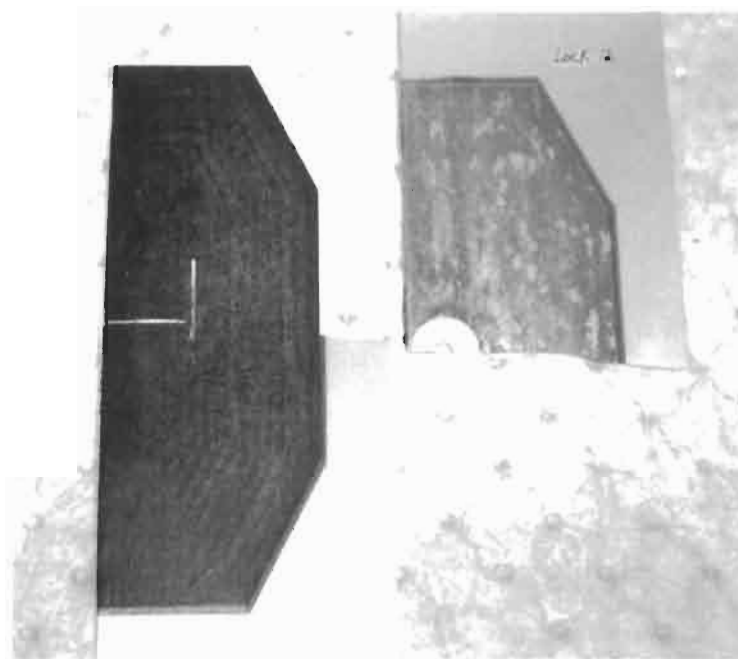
Ultimate failure of BE-8 configuration (lock12) showing: (1) failure mode of the specimen, (2) fracture of the adhesive and (3) implanted disbond.
